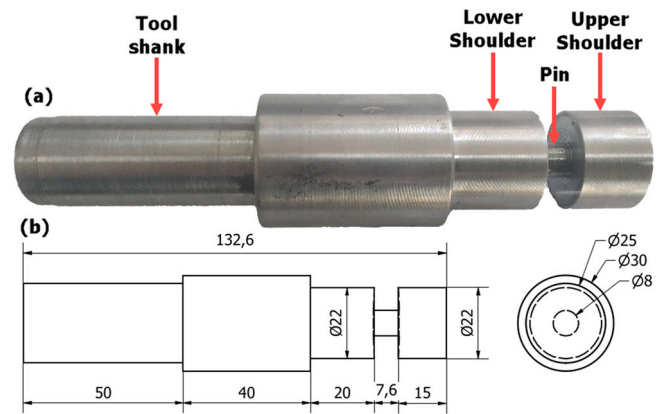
(a) Photograph and (b) dimensions of bobbin tool (All dimensions in mm).
